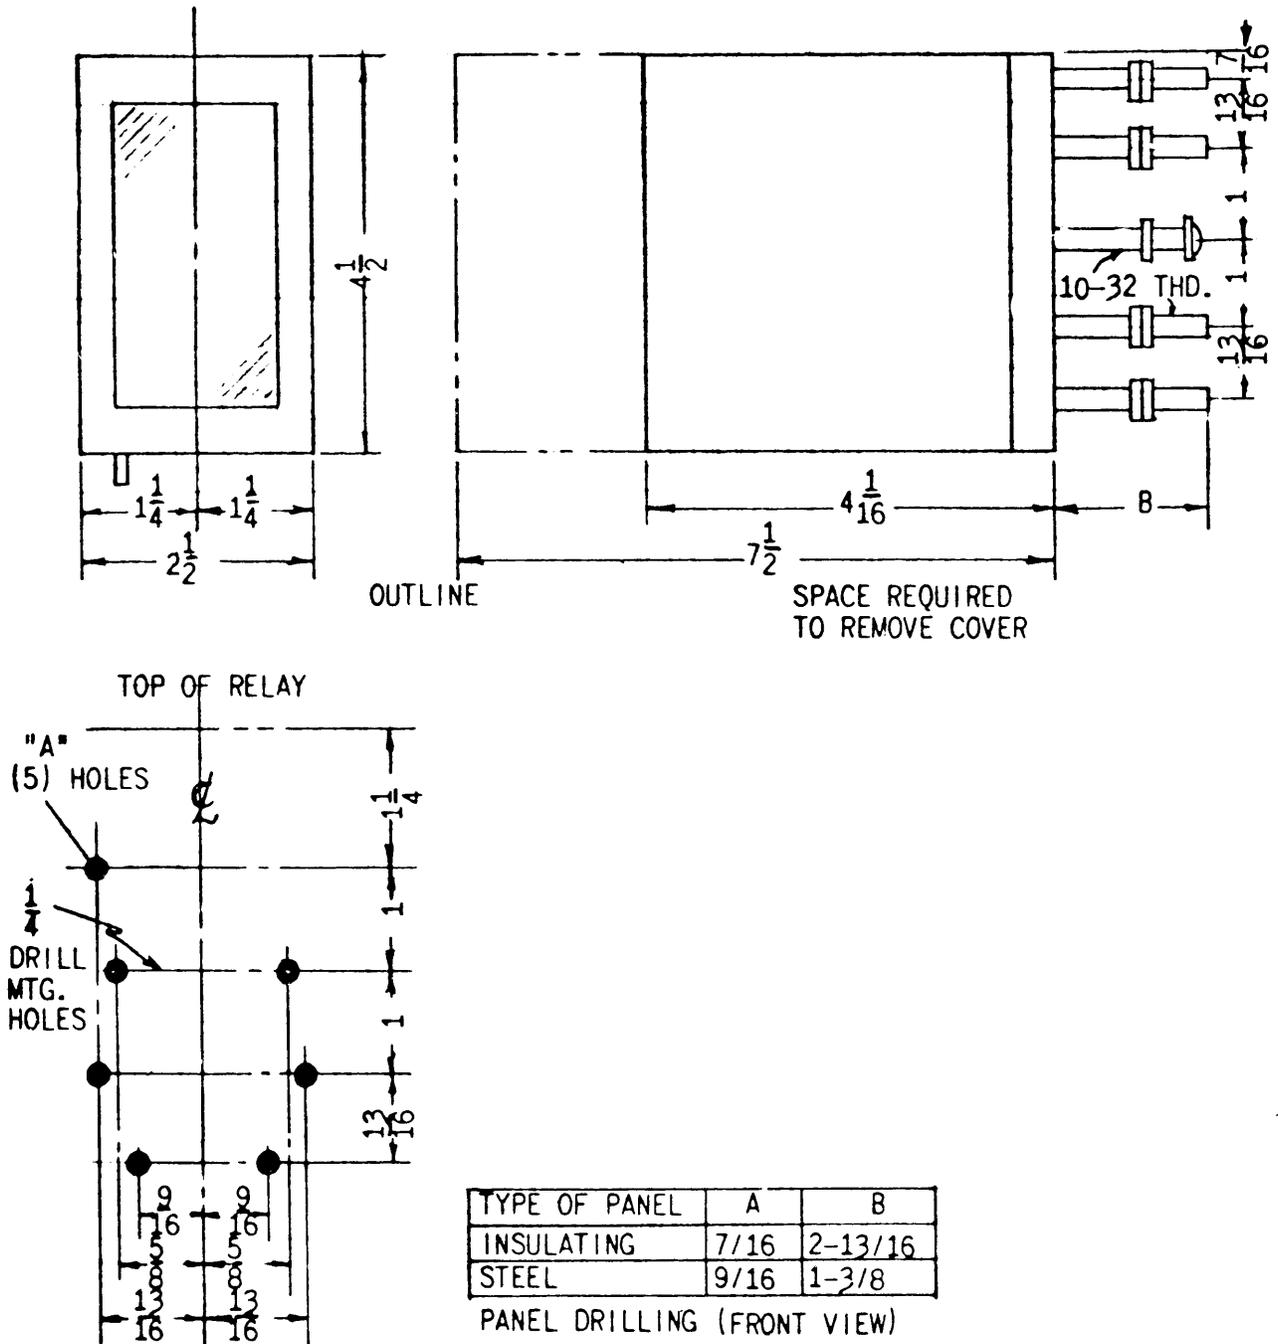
(0165A6003-3): HAA15A/15B/15C/15D/15H BACK CONNECTED PROJECTION MOUNTED OUTLINE AND PANEL DRILLING DIMENSIONS
